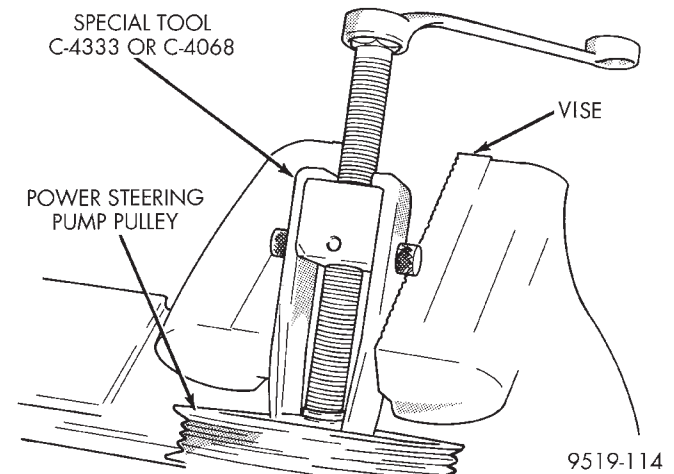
Removing Pulley From Power Steering Pump Shaft
